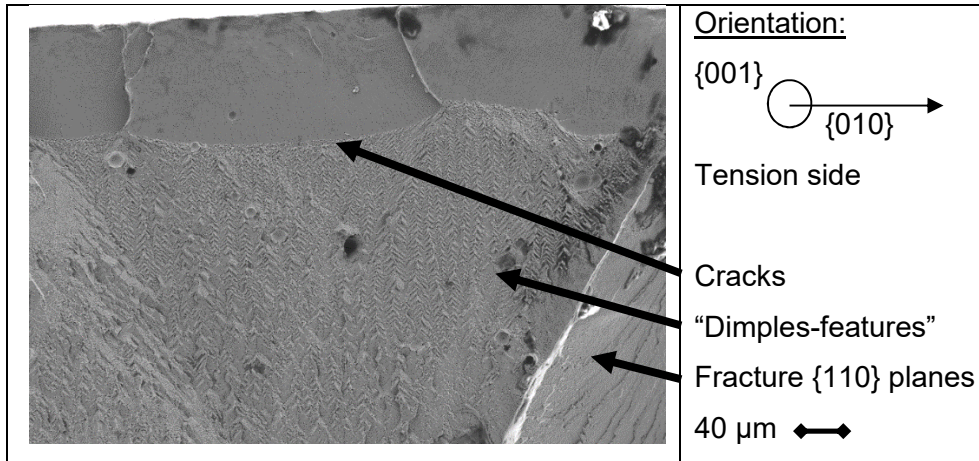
Secondary Electron image of fracture surface of sample E2
